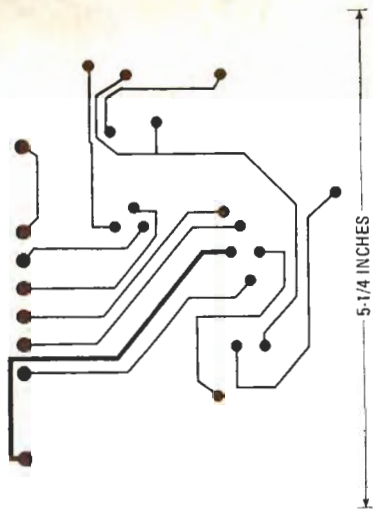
FOIL PATTERN for top of telephone adaptor board.
